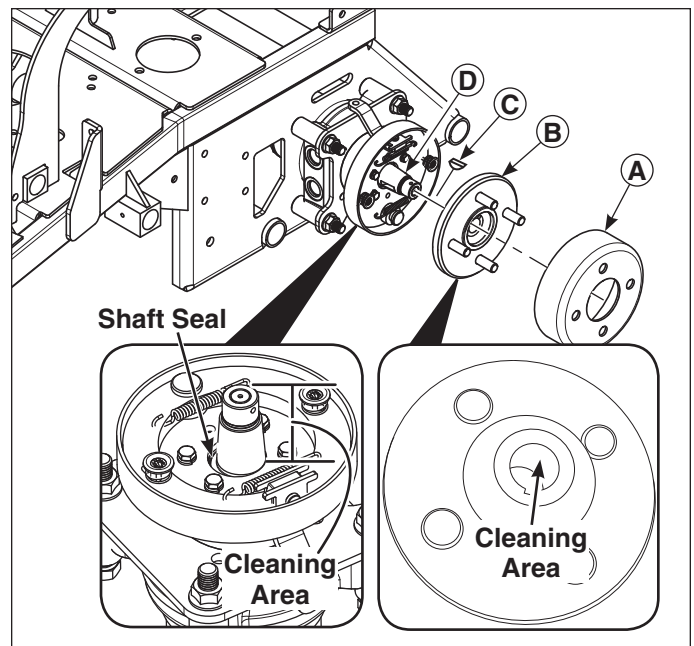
Cleaning the Brake Hub and Tapered Shaft
